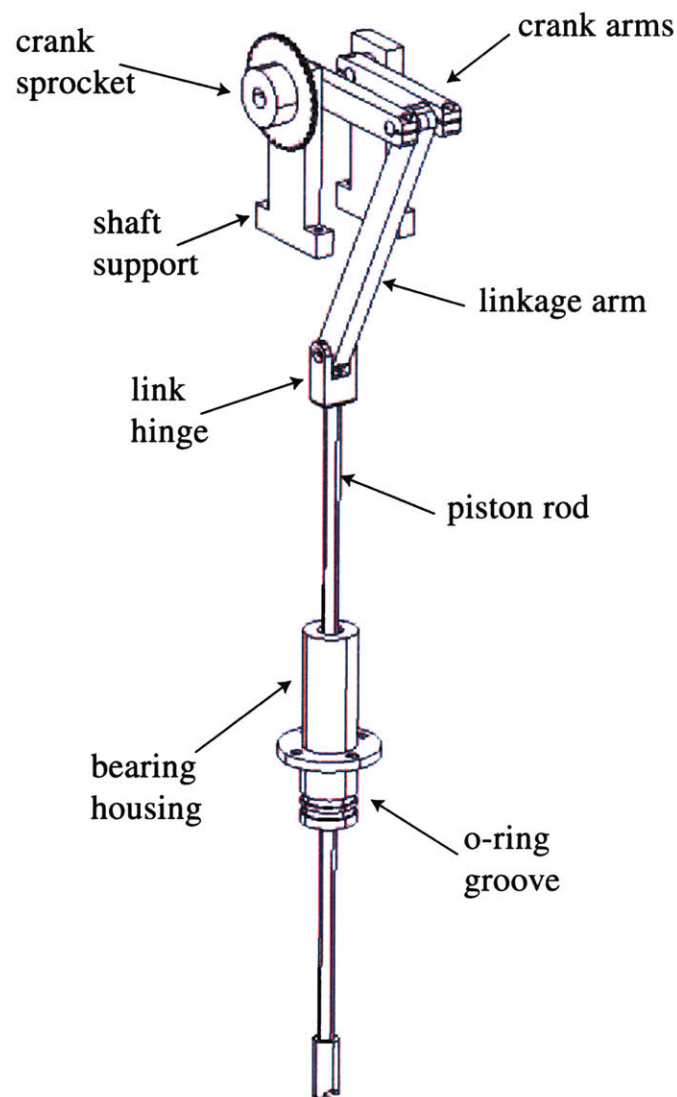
Piston linkage mechanism from top to bottom: vertical stand-offs support the pair of crank arms; at the top of the crank arms a shaft connects one side to the crank sprocket, the other end of the arms connect to the linkage arm; at the lower end of the linkage arm at hinge joint is attached, connecting the link-arm and the piston rod; the piston rod travels through the two linear bearings seated inside of the bearing mount shown halfway along the piston rod; the bottom of the rod is connected to the neoprene mat.
